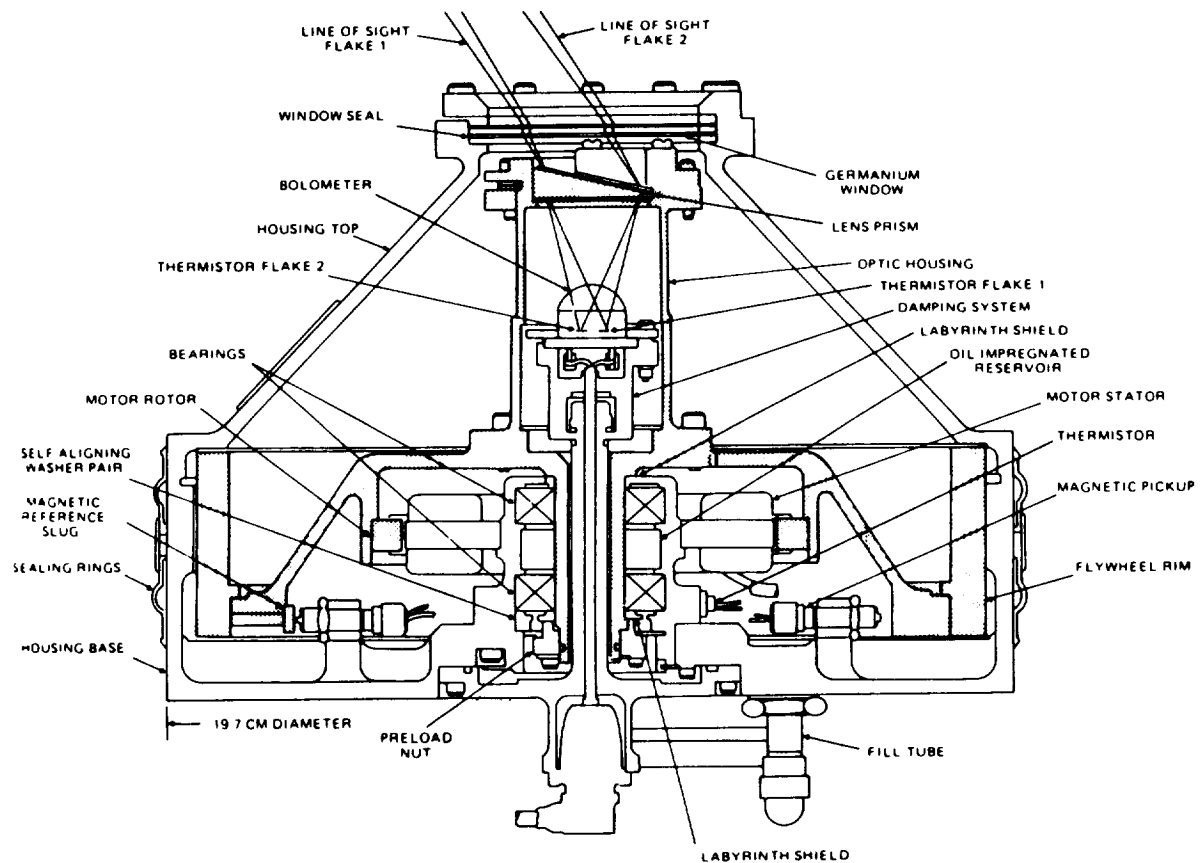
The original ITHACO SCANWHEEL featured a hollow shaft rotor in order to accommodate the on-axis refractive optical system. Shading indicates rotating components consisting of flywheel and prism assembly.
